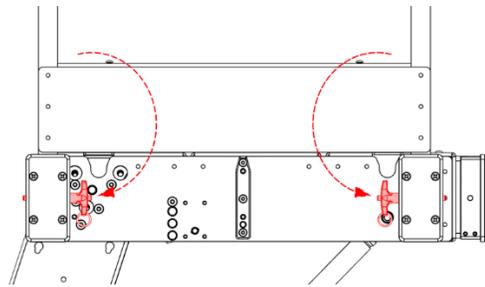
If a thumbwheel or a handwheel is missing, use AN4-10A bolts and AN960-416 washers (2 per side) to replace missing component. Torque 75-100 (+/- 5) in-lbs.
